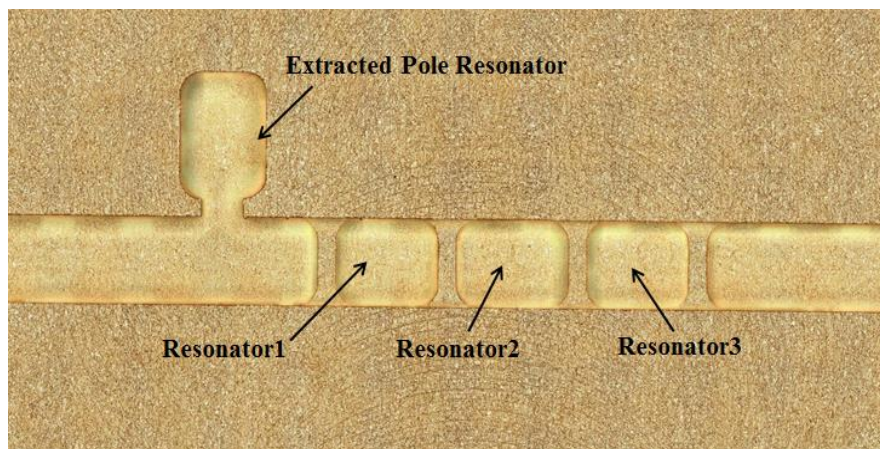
Photograph of the internal cavities of the fabricated CNC milled extracted pole filter.
